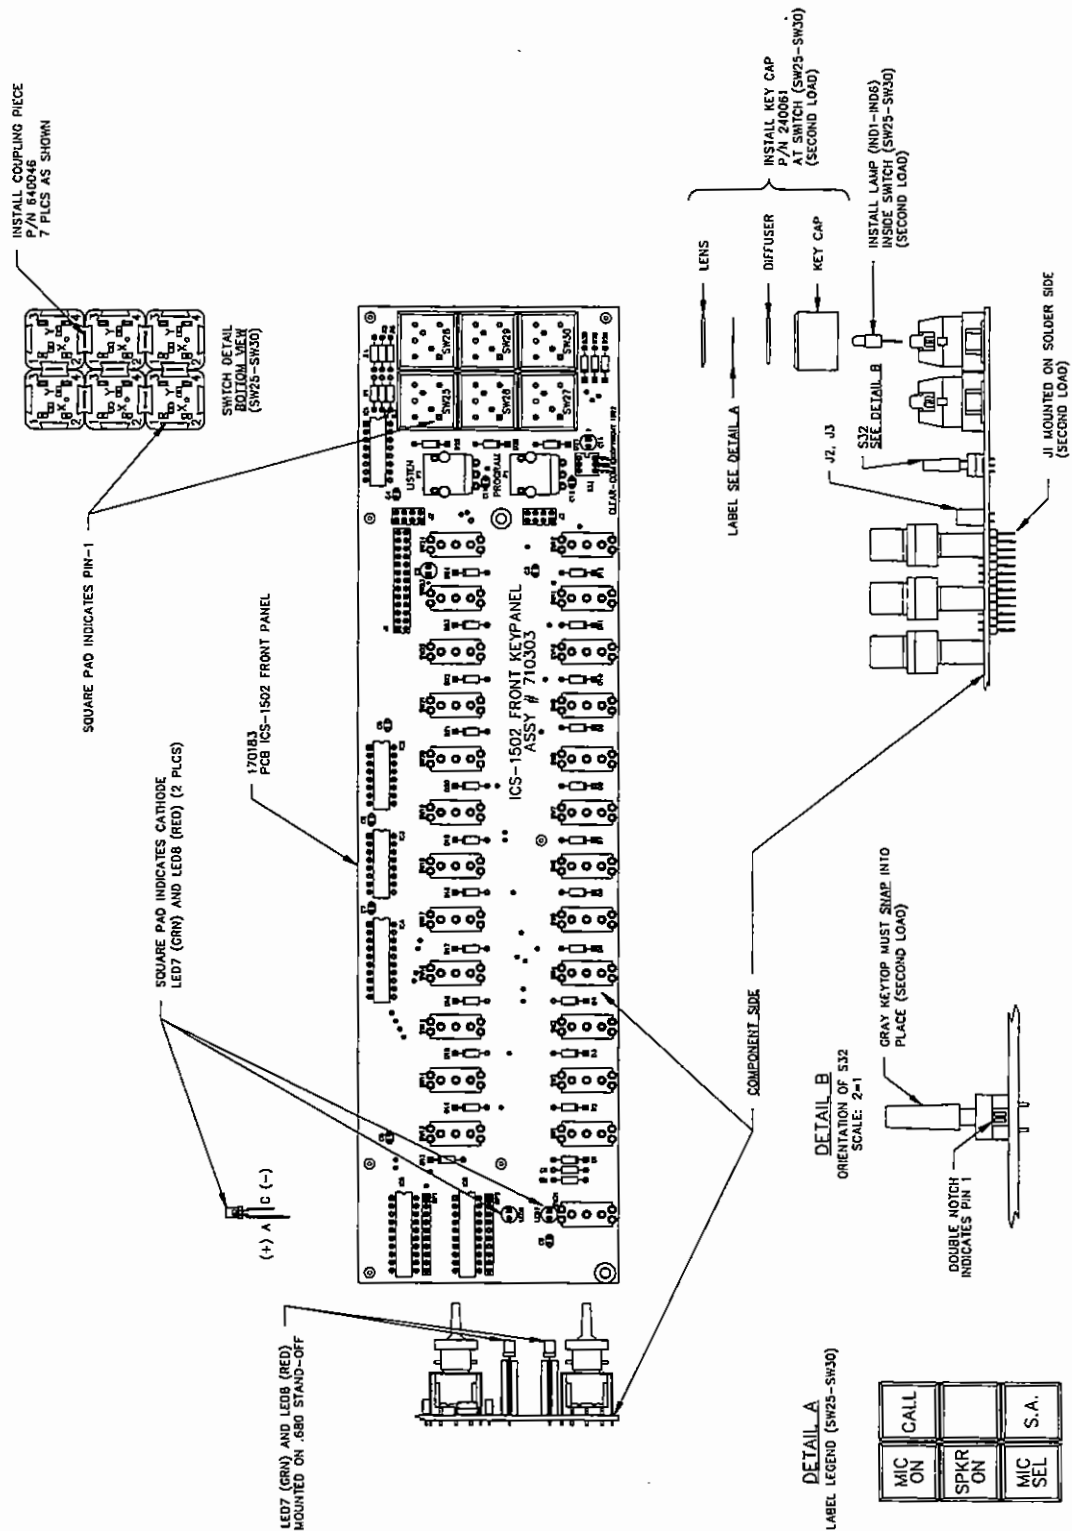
Assembly Drawing - ICS-1502 Front Panel PCB Rev. A
